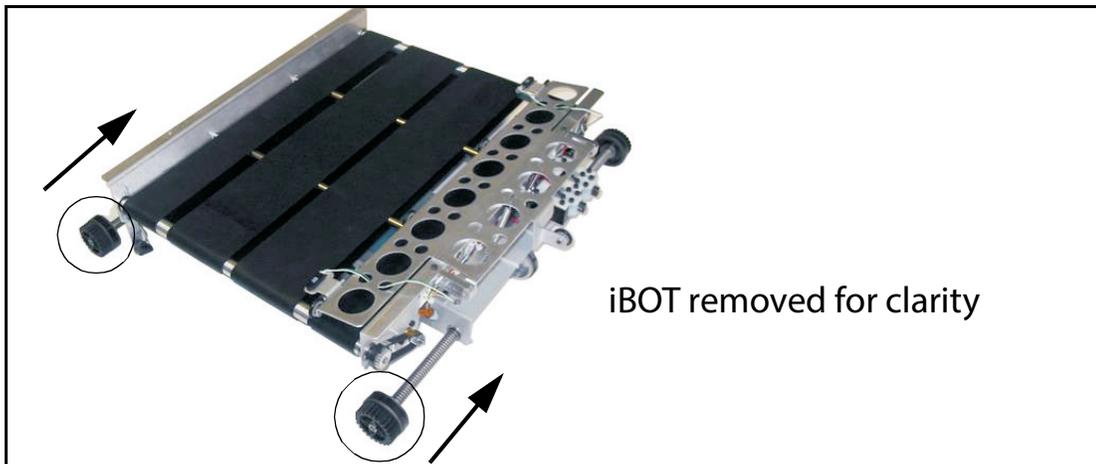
Pull the tire/gear wheel back to remove the iBOT
